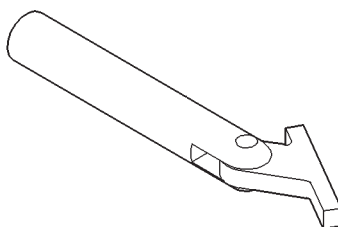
Crankshaft Main Bearing Remover/Installer Tool C3059
